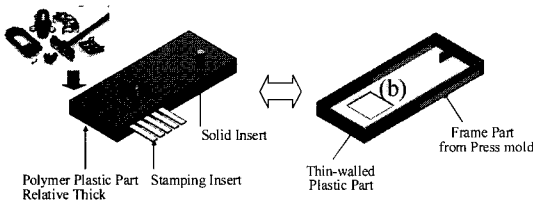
Comparison of technology between insert injection molding and outsert injection molding((a) Insert molded part, (b) Outsert molded part)
